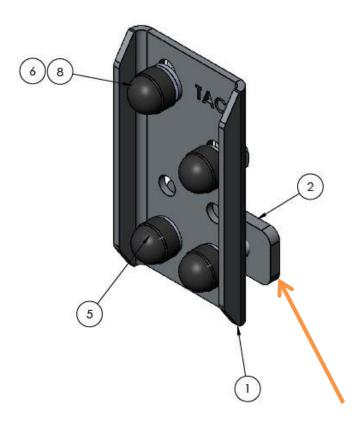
The above Plate with threaded holes is inserted into the below rail inside the Load Bin
